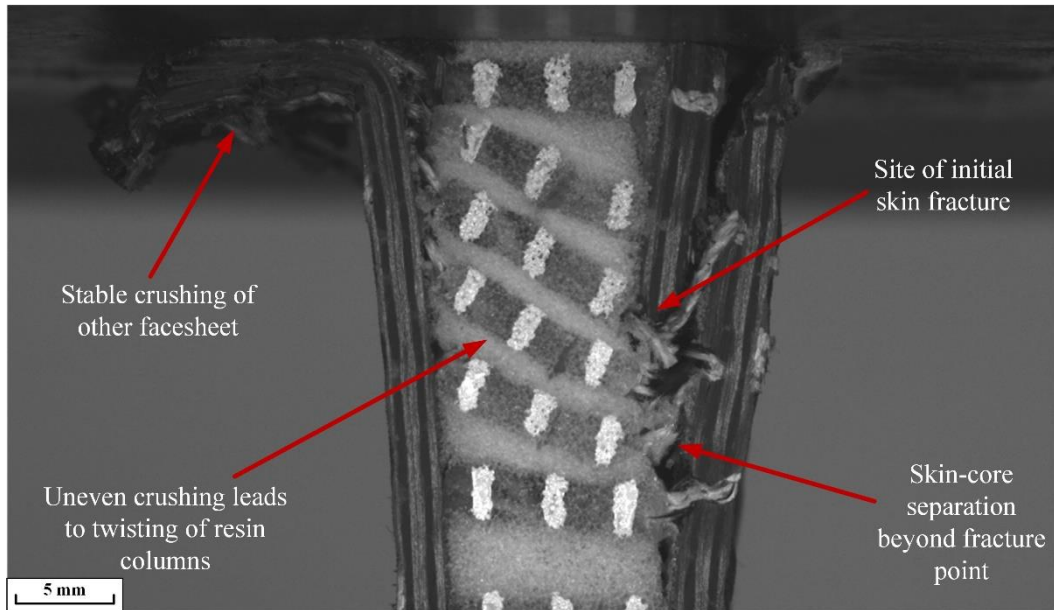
Failure mechanism after skin fracture in Coupon B5.
